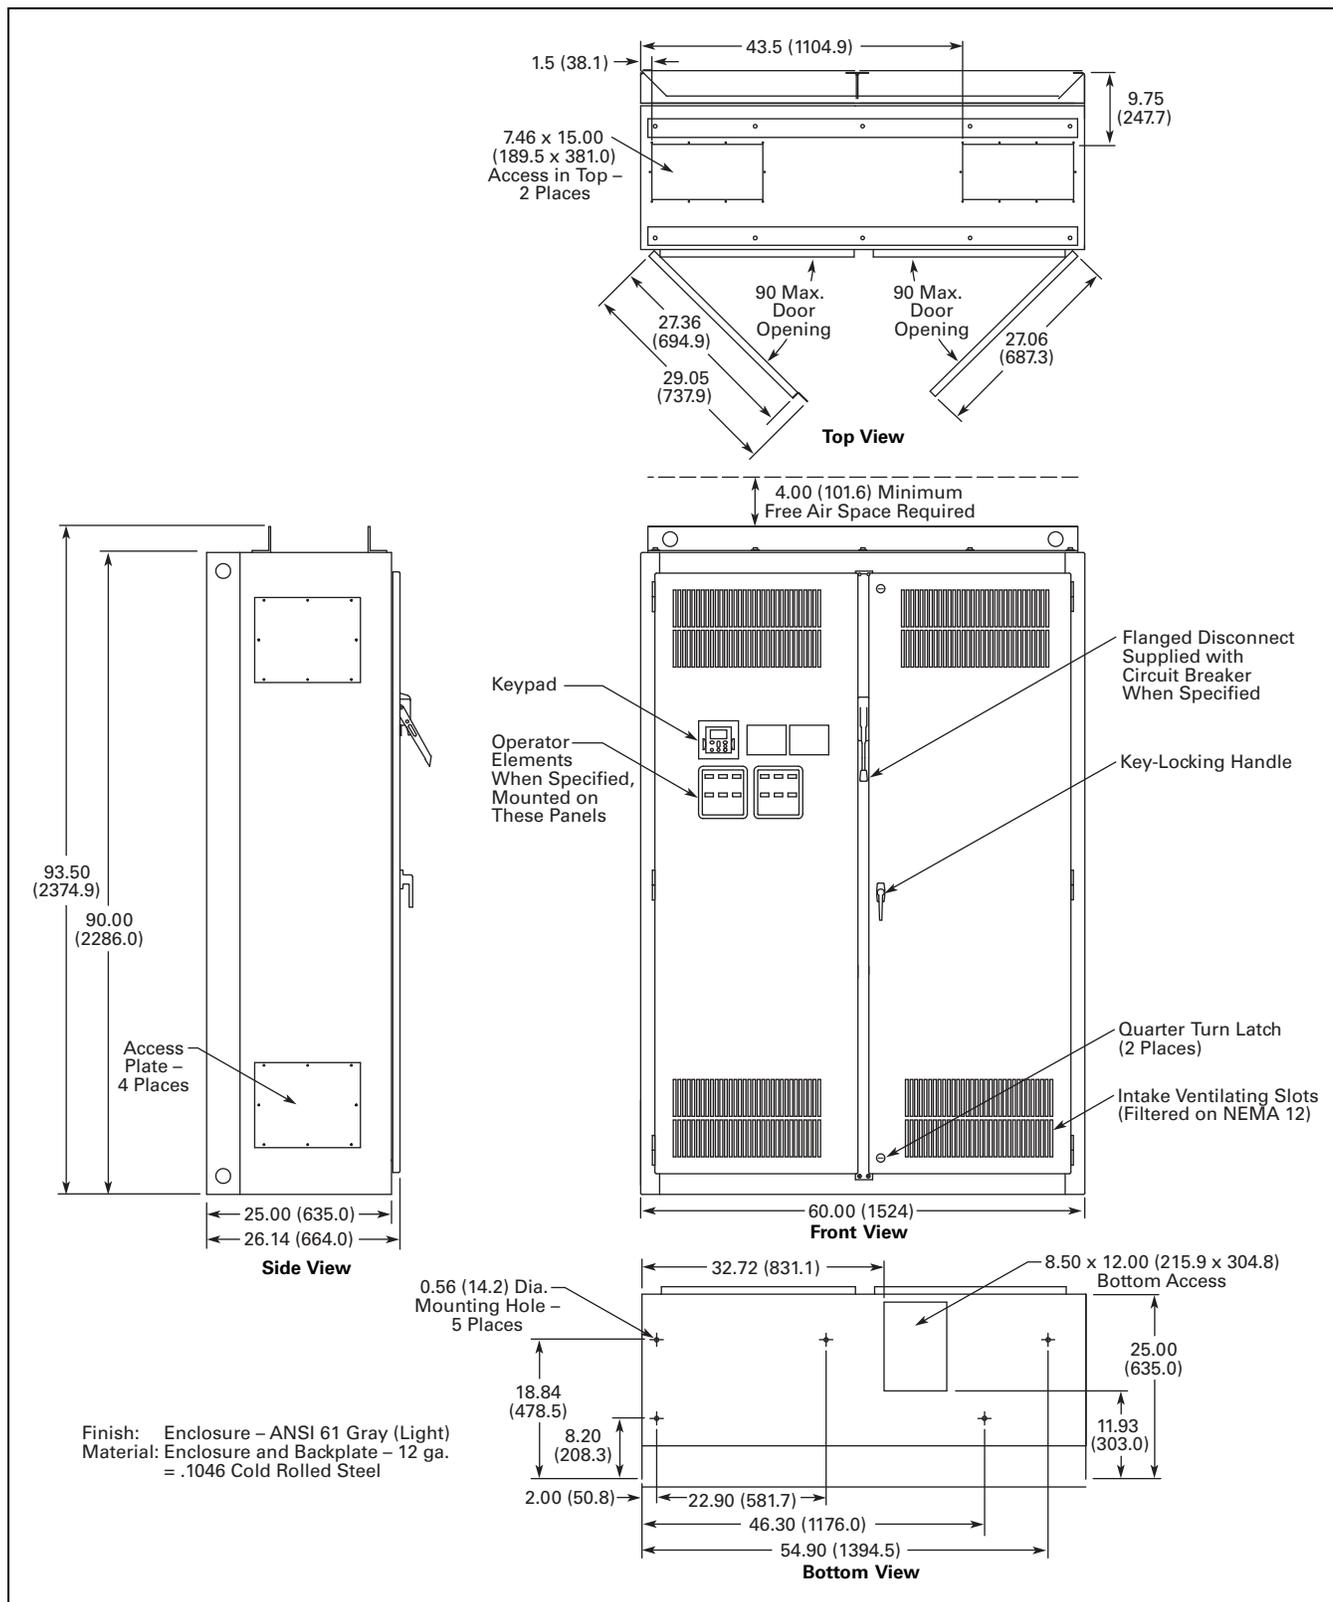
300–400 hp I_L and 250–350 hp I_H—Approximate Dimensions in Inches (mm)
